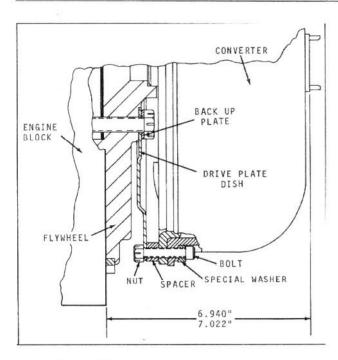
CUTAWAY ILLUSTRATION OF TORQUE CONVERTER INSTALLED ON DIESEL ENGINES
